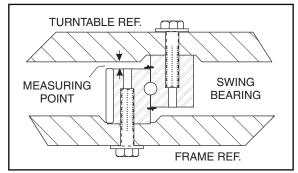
Swing Bearing Tolerance Measuring Point
